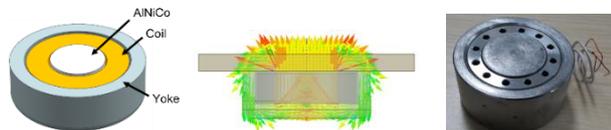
EPM chuck with only AlNiCo magnet for attaching and detaching
